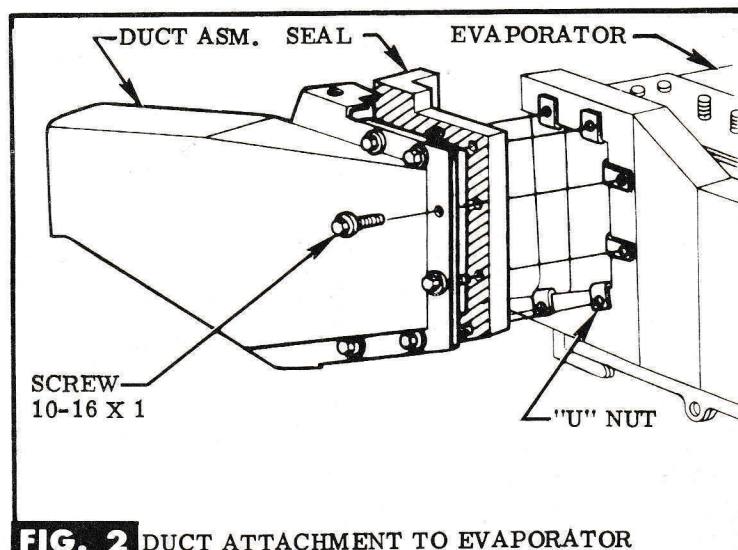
DUCT ATTACHMENT TO EVAPORATOR
